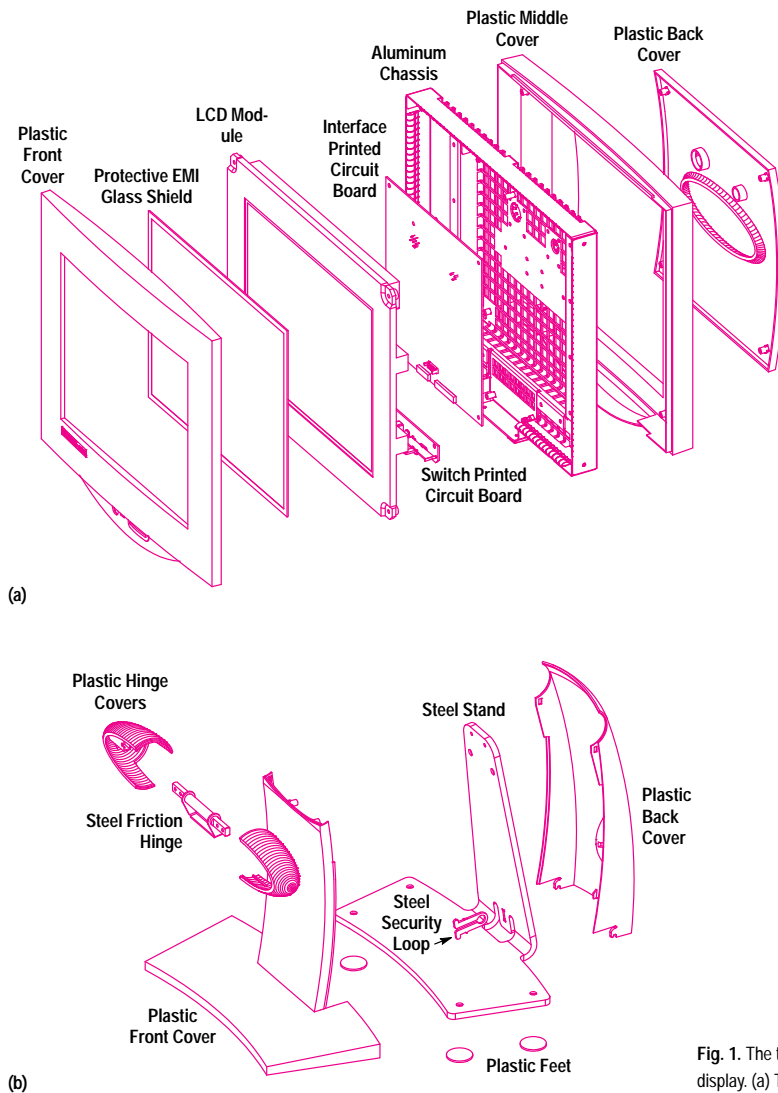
The two assemblies that make up the product design for the HP S1010A flat panel display. (a) The chassis/display assembly. (b) The stand assembly.
